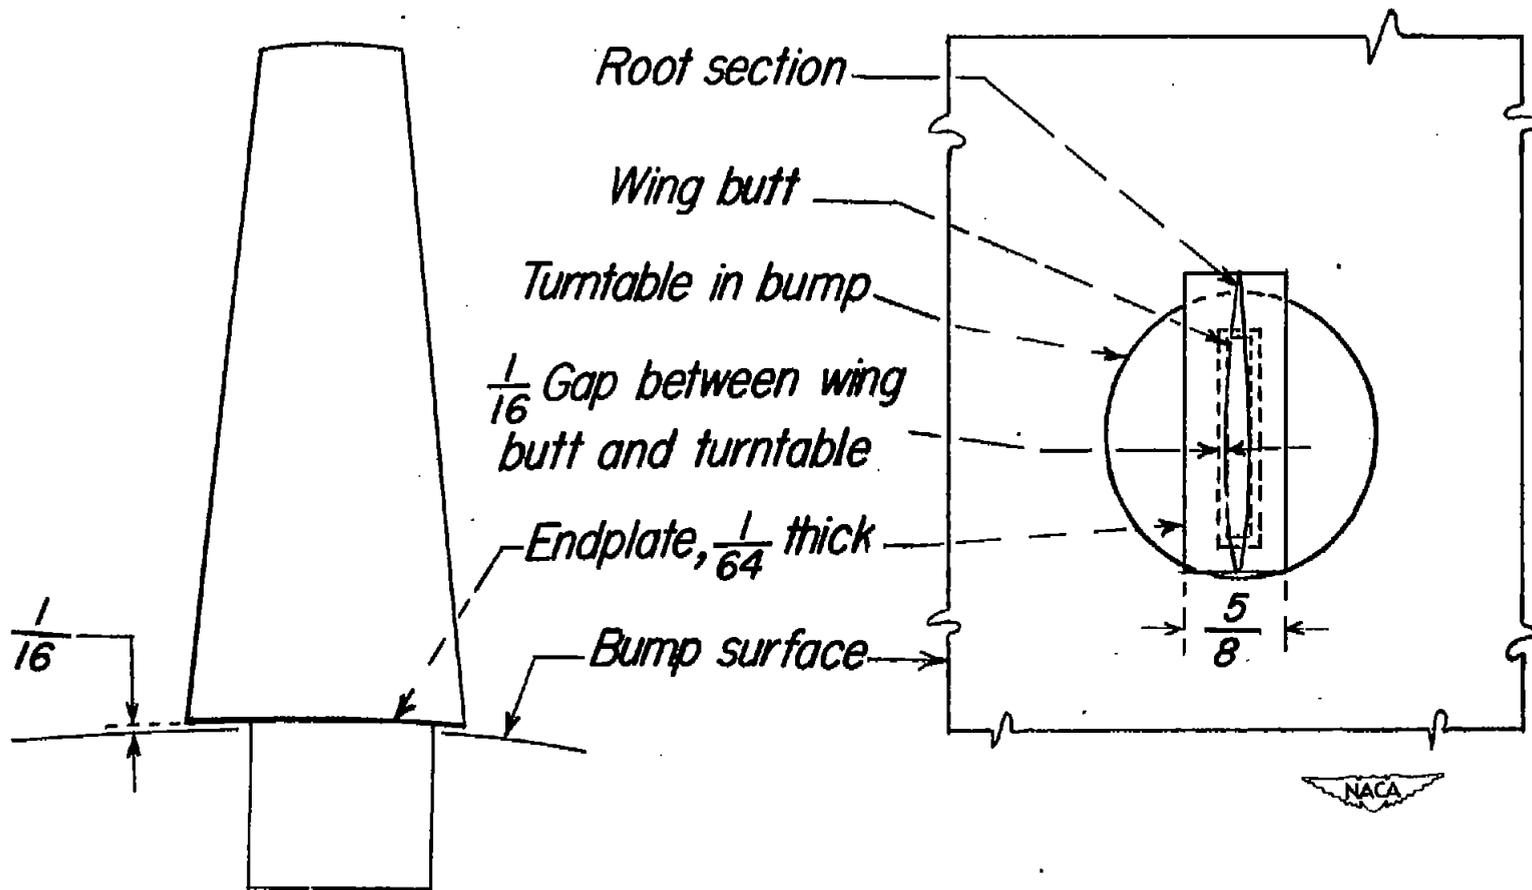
Details of end plate and gaps where wing butt passes through bump surface. (Dimensions in inches.)
